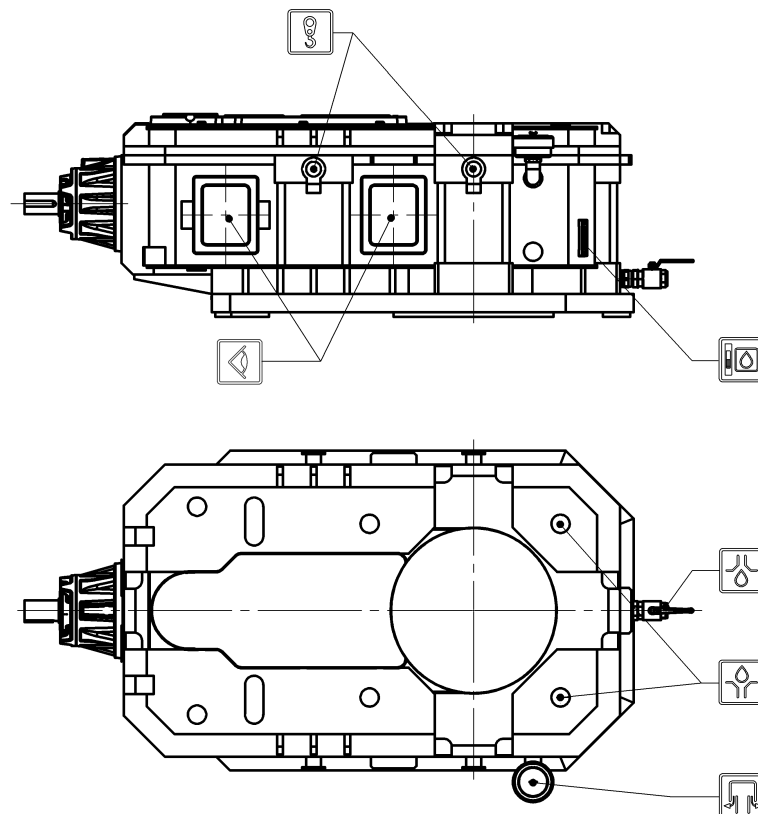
Symbols and mounting positions of ML..RV..N series gear units
